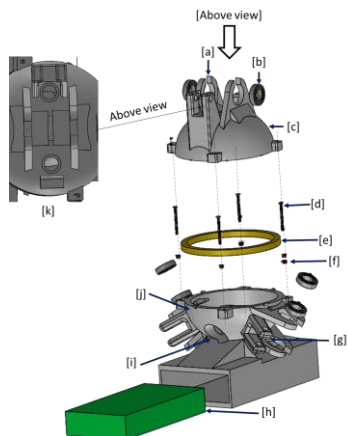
[a] Arm basement. [b] ball bearing. [c] Sensing hemisphere. [d] Screw. [e] off-the-shelf O-ring. [f] Nut. [g] Spring anchor. [h] Battery. [i] Hole to connect inside and outside of the sphere electrically. [j] Control hemisphere. [k] Water inlet and outlet.
